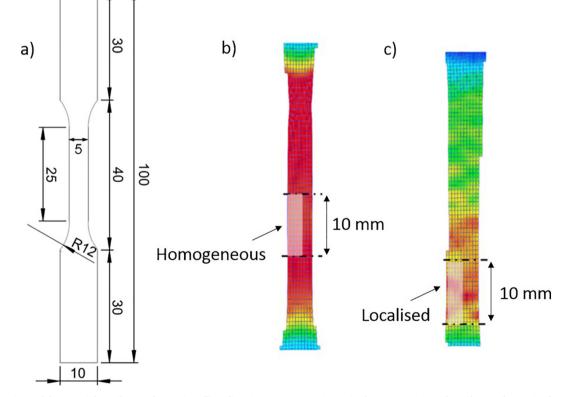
a) Dimensions of the uniaxial tensile samples cut in rolling direction. Segment positions in the gauge section of tensile samples strained to 15% equivalent strain b) FG-TWIP c) TRIP.
